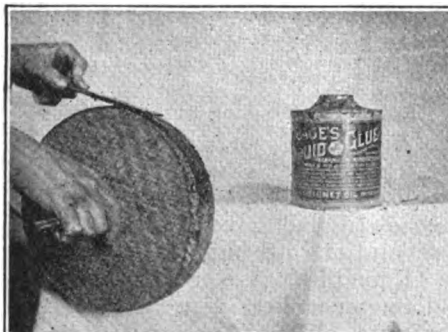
FOR THE POLISHING WHEEL. GLUE IS FIRST APPLIED TO THE WHEEL FACE
